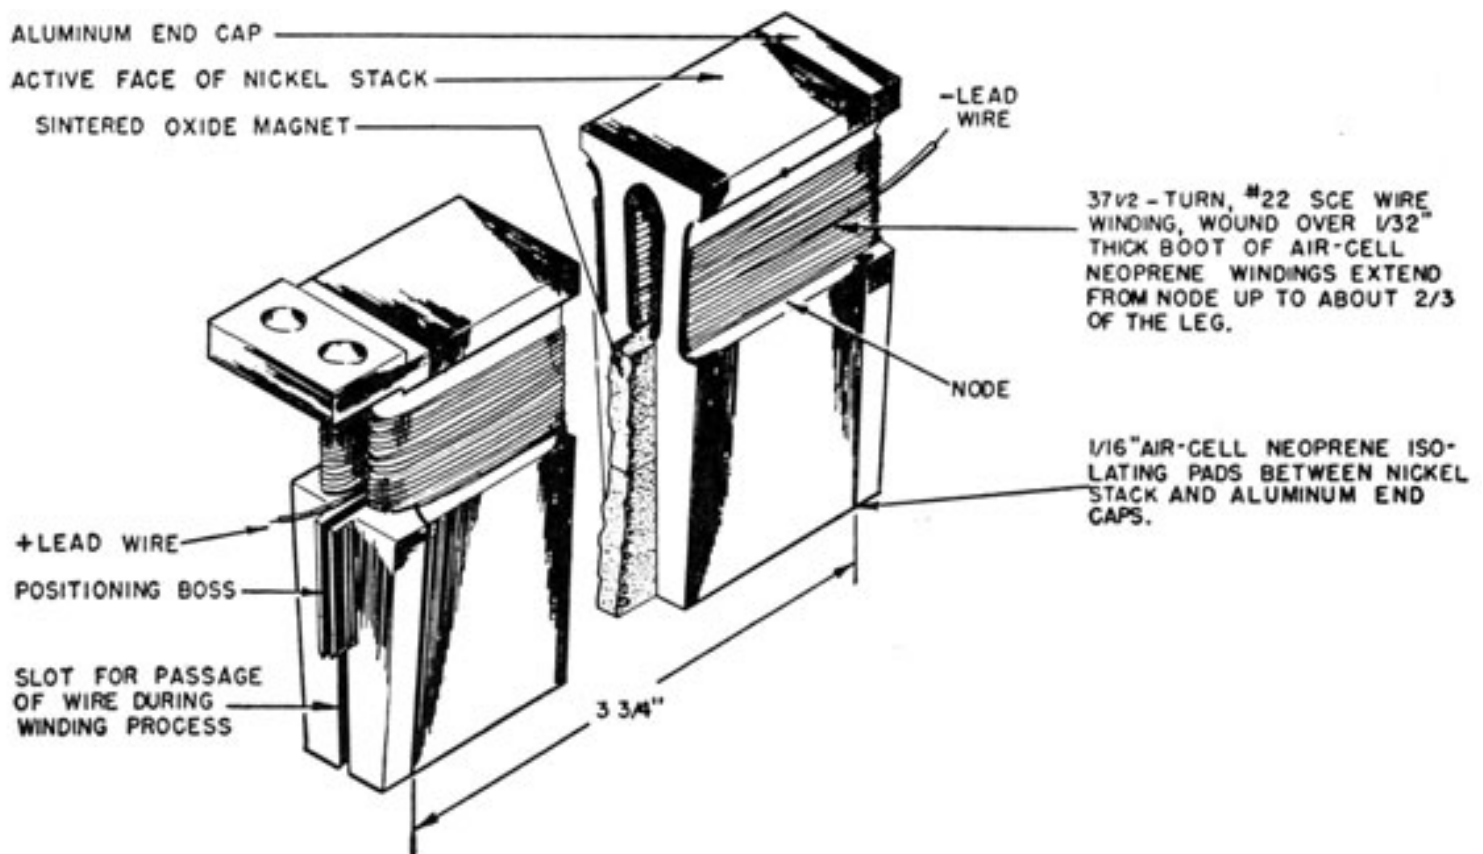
Cut-away view of QHB-a transducer unit.
